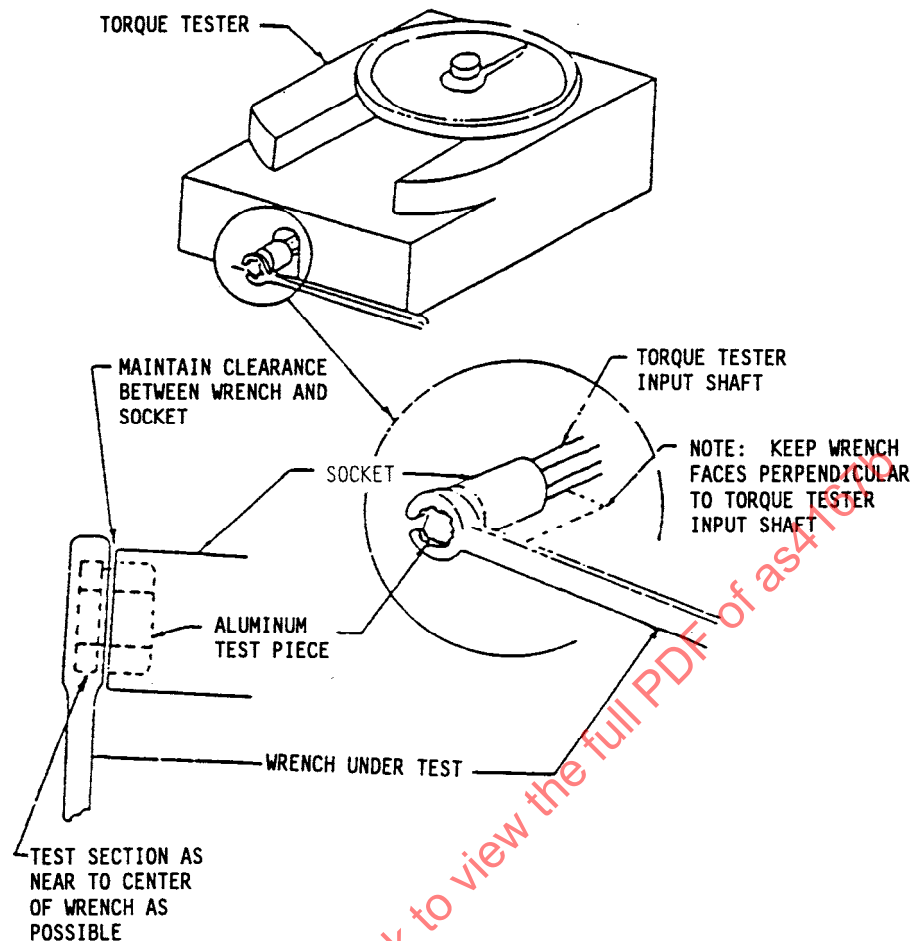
TYPICAL TEST SETUP FOR ALUMINUM MANDREL TEST
